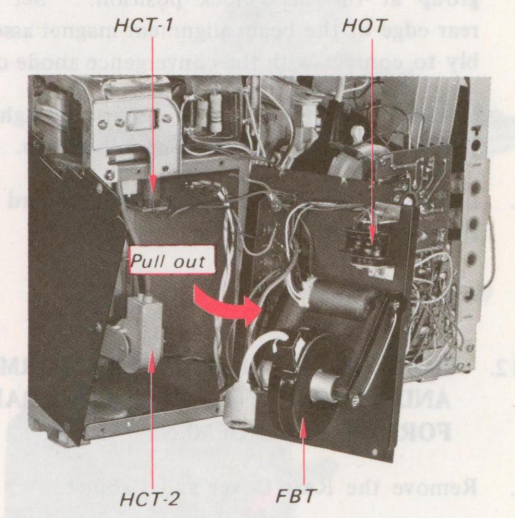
Cage disassembled for access to the flyback and horizontal output transformer
